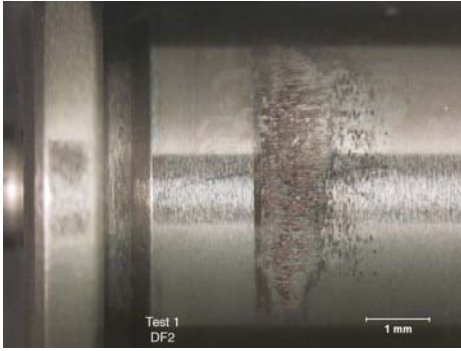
Upper Piston, Injector Hydraulic Coupler, ULSD
